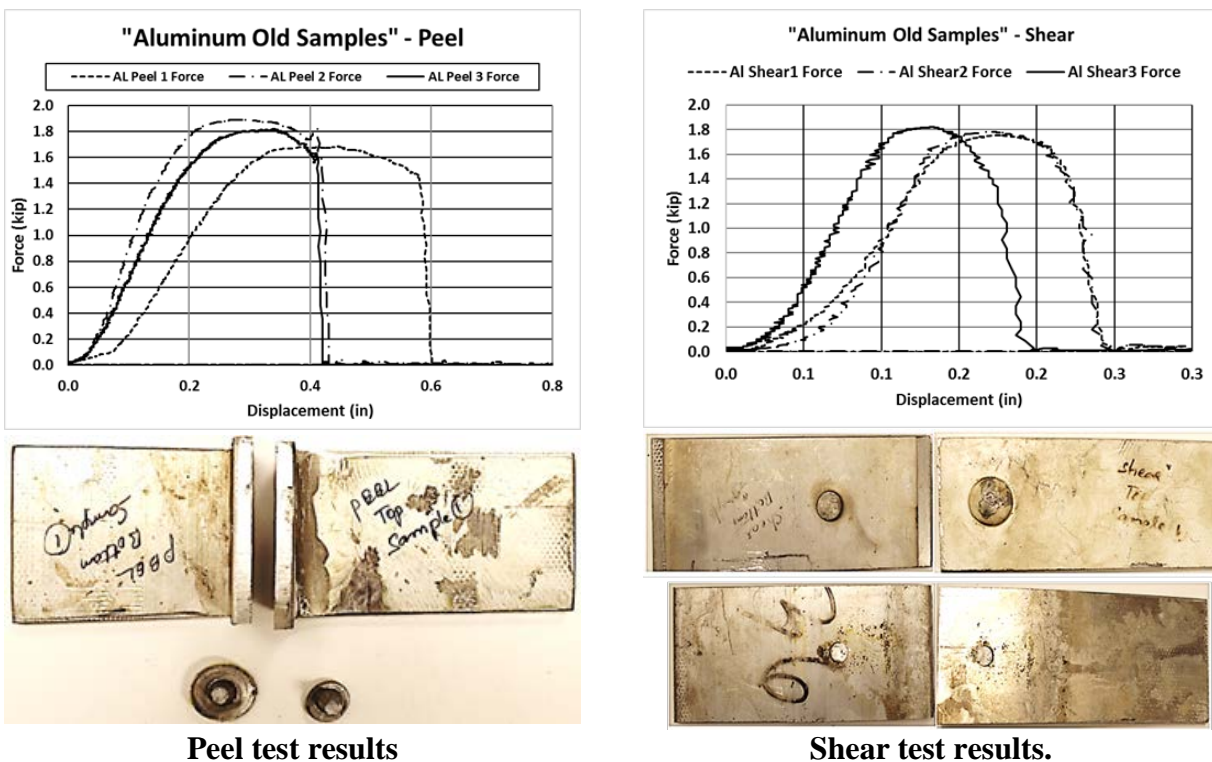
‘Old’ Aluminum riveted assemblies – Peel and lap-shear tests
